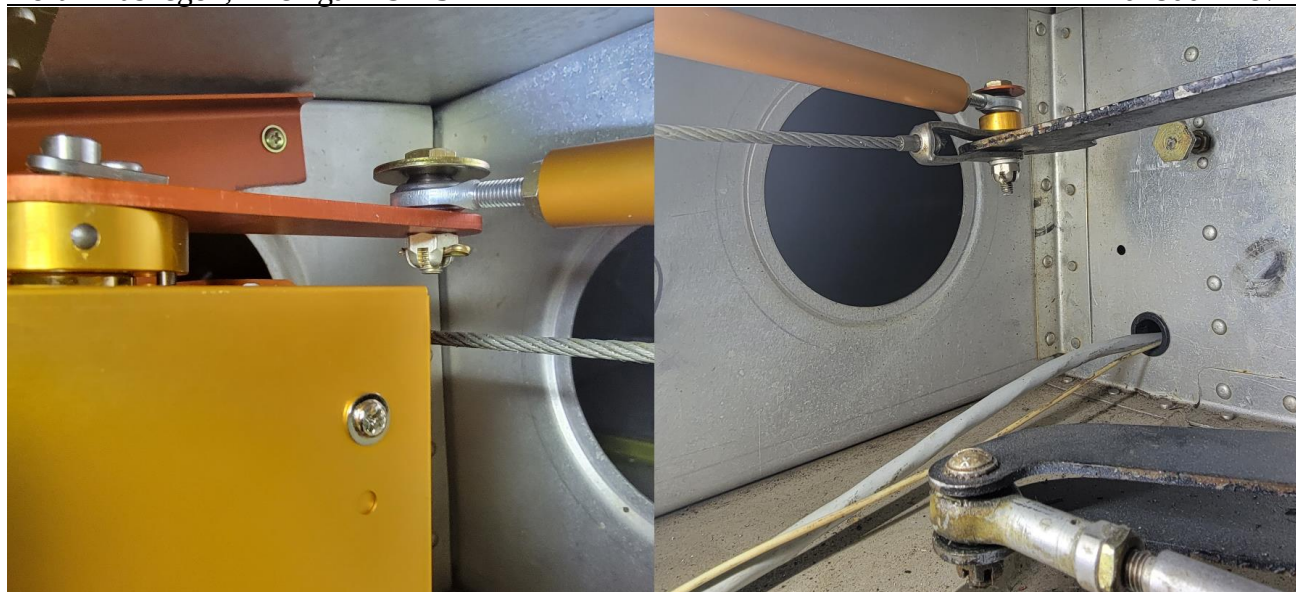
RETRACTABLE GEAR CONNECTIONS
